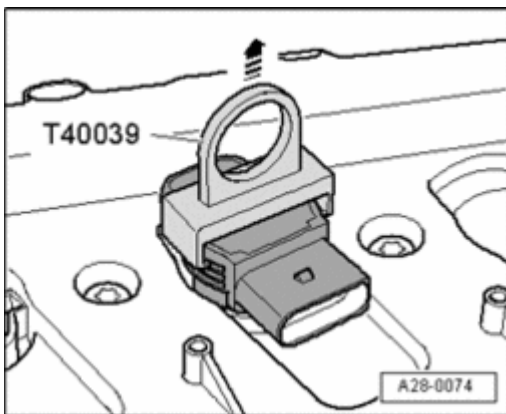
Removing Ignition Coils Using Ignition Coil Puller T40039.
